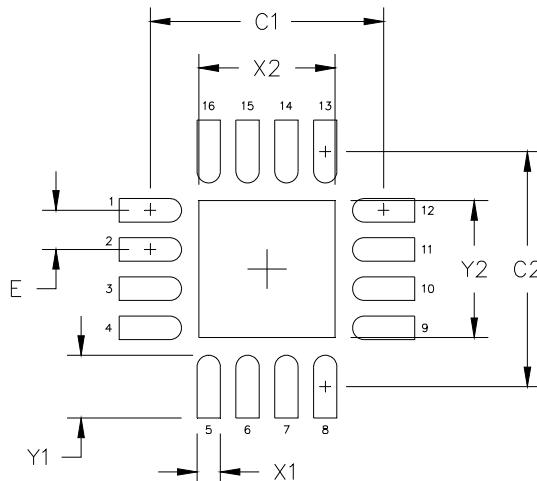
Si53306 3x3 mm 16-QFN Package Land Pattern
